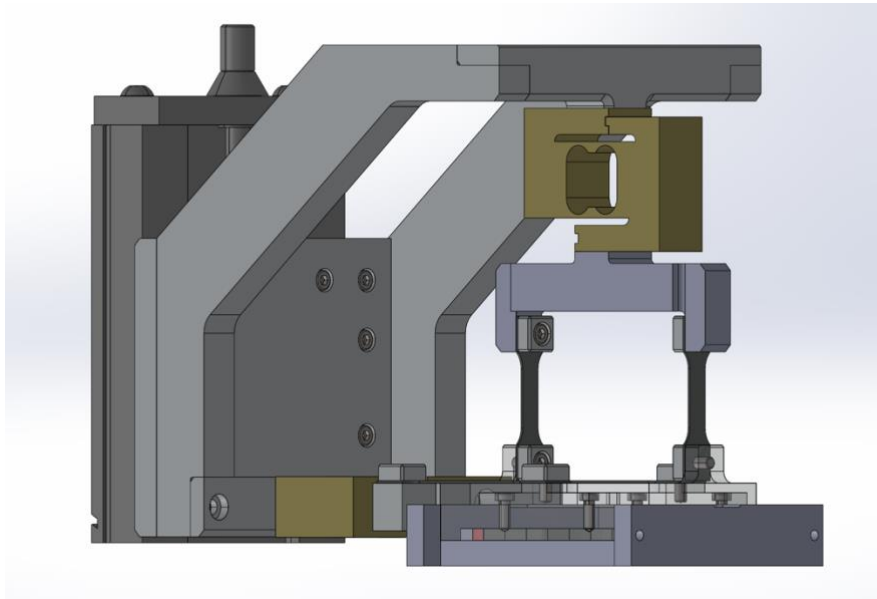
Quasi-Static Test Layout, Jig Implementation
